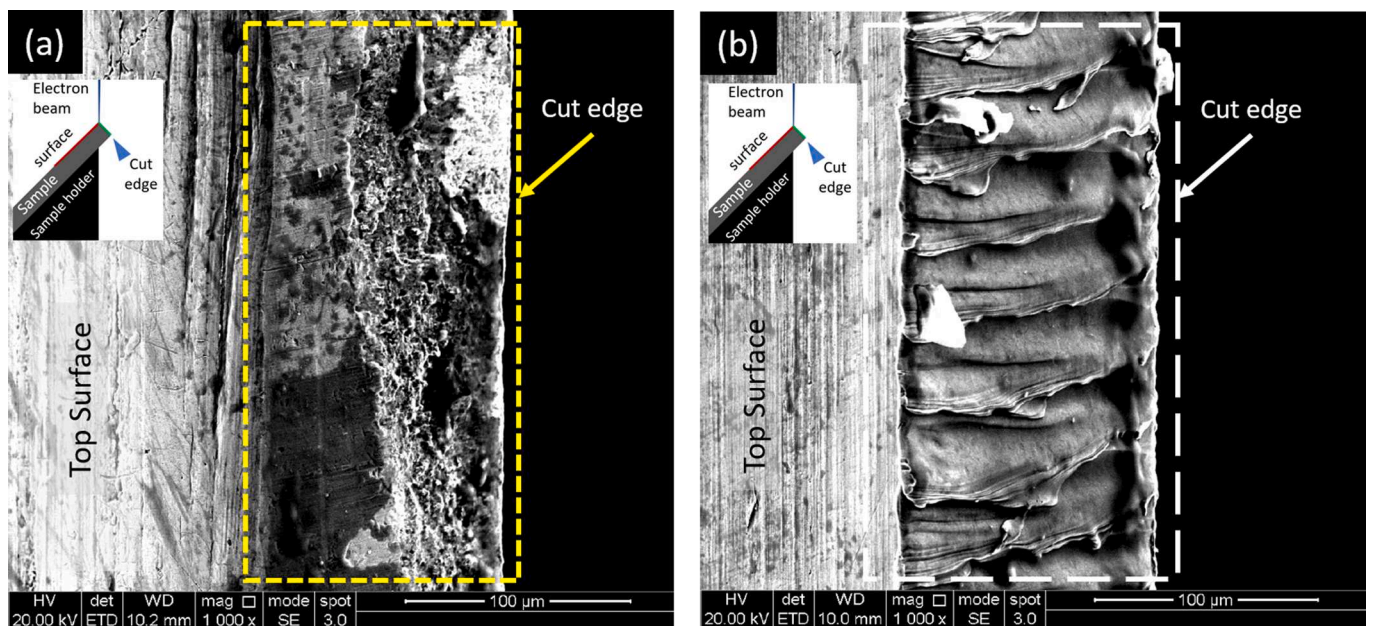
Micrographs of the cut edge after (a) shear cutting and (b) laser cutting showing shear and fracture regions due to the shear cutting and the kerfs on the laser cut surface.
